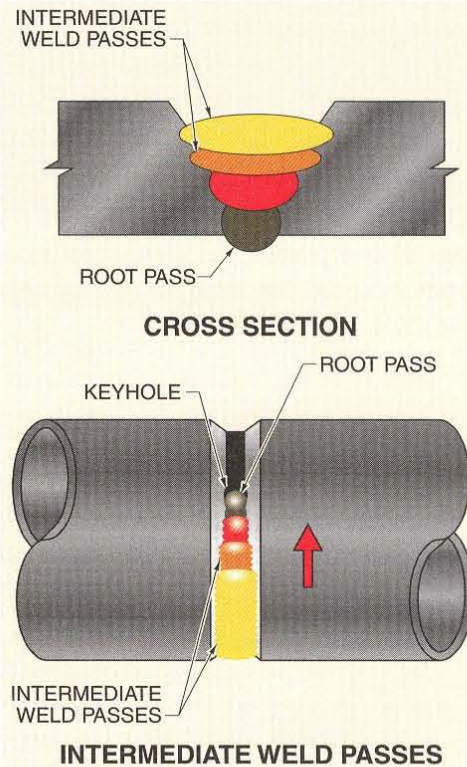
Intermediate weld passes are used to build up the weld and fill the joint, creating a strong, sound weld.
